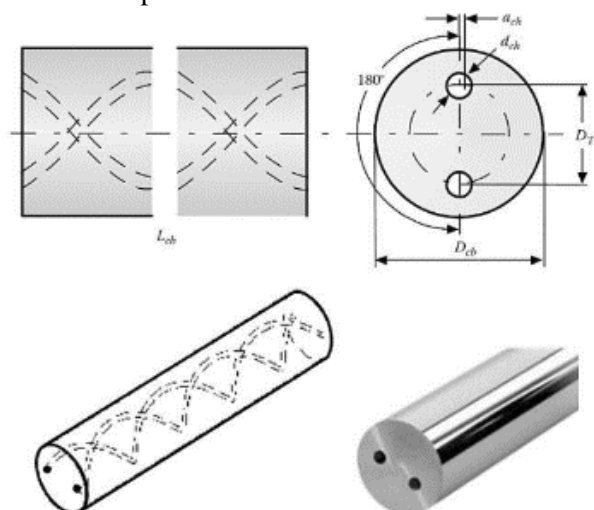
Carbide rod with two helical coolant holes [13].
